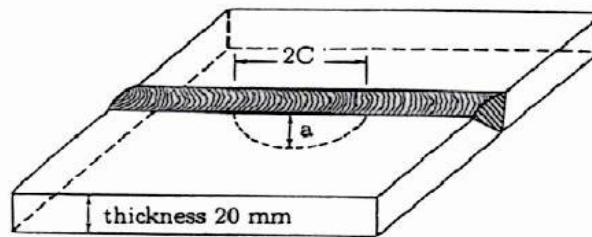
Surface Crack Initiated From Butt Welding Joint
